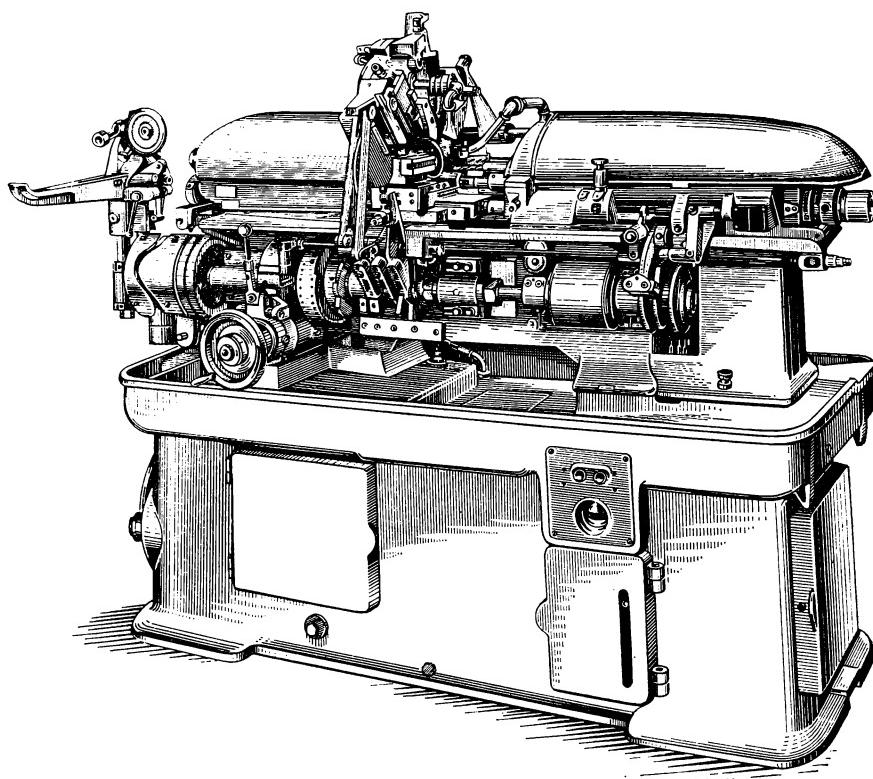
Model PF automatic screw machine (Manurhin, France)
